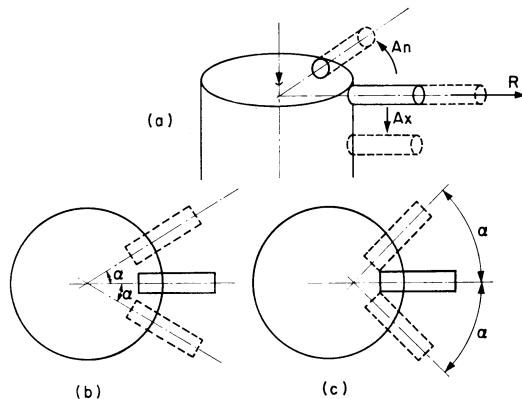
Angular motion: (a) tridimensional motion; (b) centric axial motion; (c) eccentric axial motion
